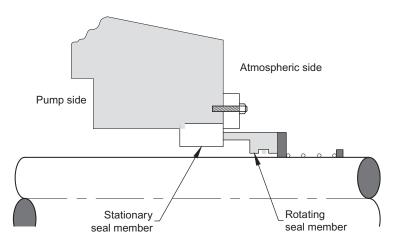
Schematic diagram of external mechanical seal assembly.
